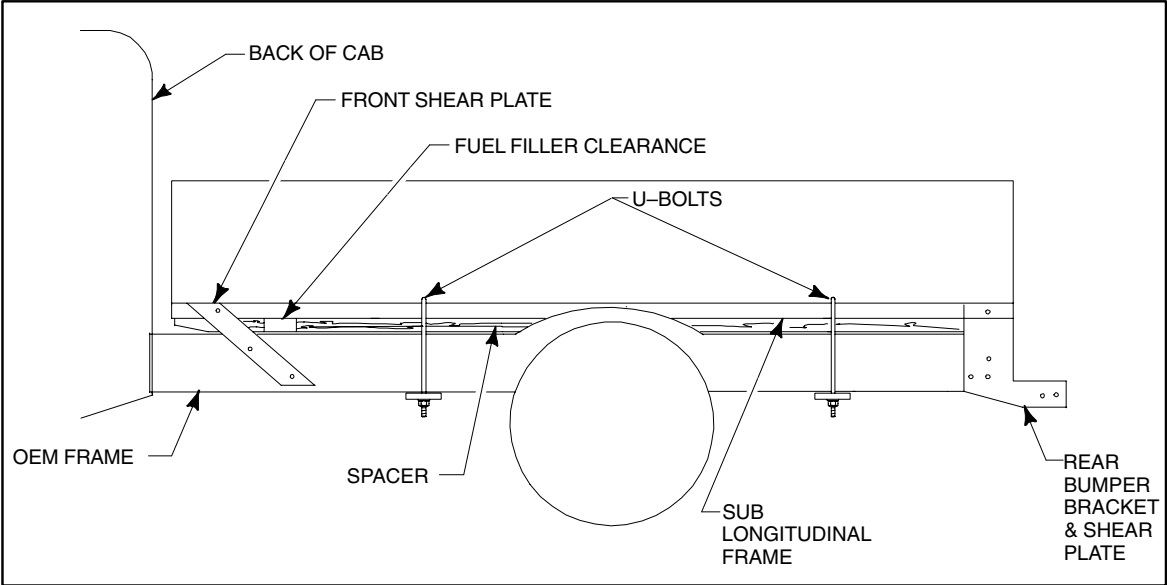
FIGURE D - SUPER DUTY F-SERIES SUB MOUNTING TECHNIQUE #4
